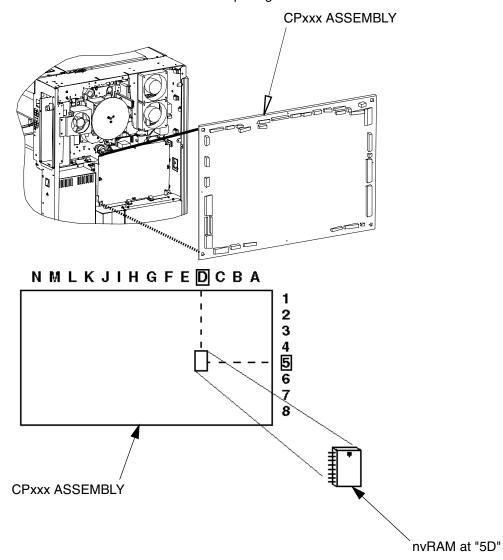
Removal of the nvRAM on CPxxx Assembly
